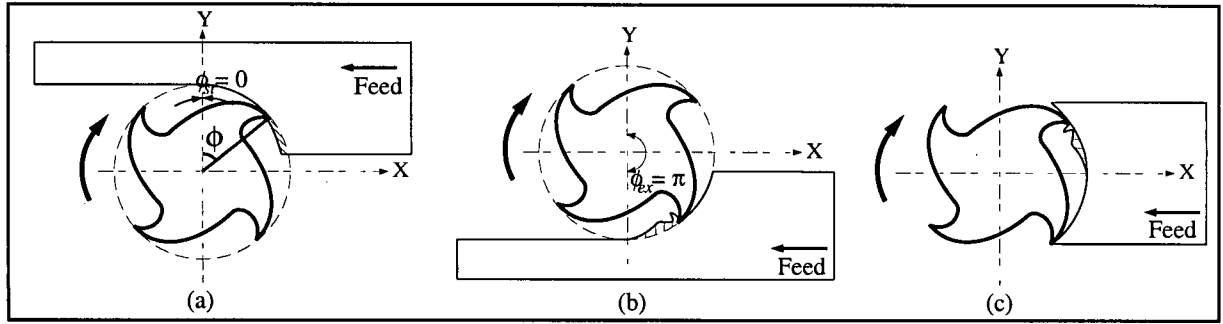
Types of Milling Operations: (a) Up Milling, (b) Down Milling, (c) Face Milling.
